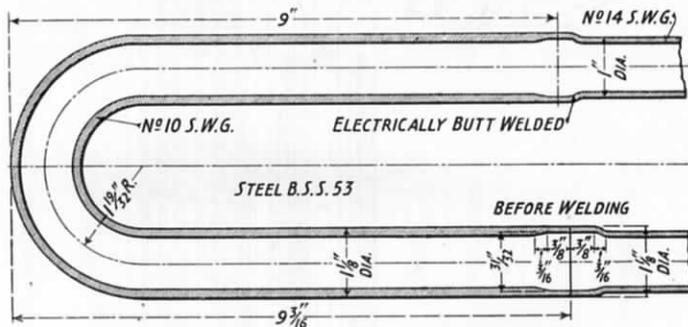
ELECTRICALLY BUTT-WELDED RETURN BEND OF "SWINDON" SUPERHEATER.
